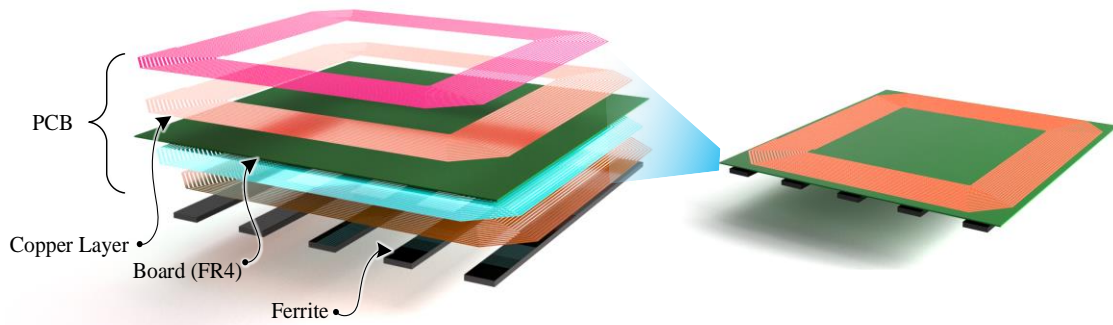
Proposed magnetic coupler made by multi-layer PCB.
